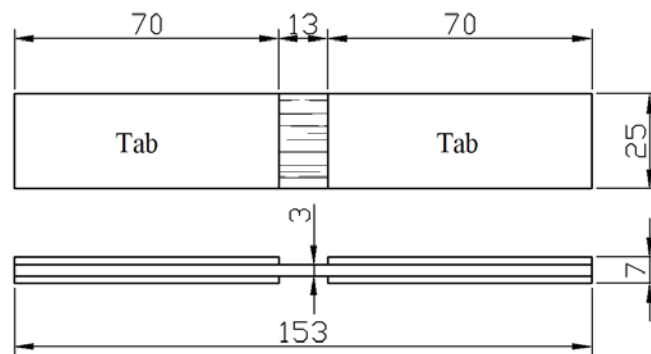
Dimensions of the compressive specimen with the gage length 13 mm.
